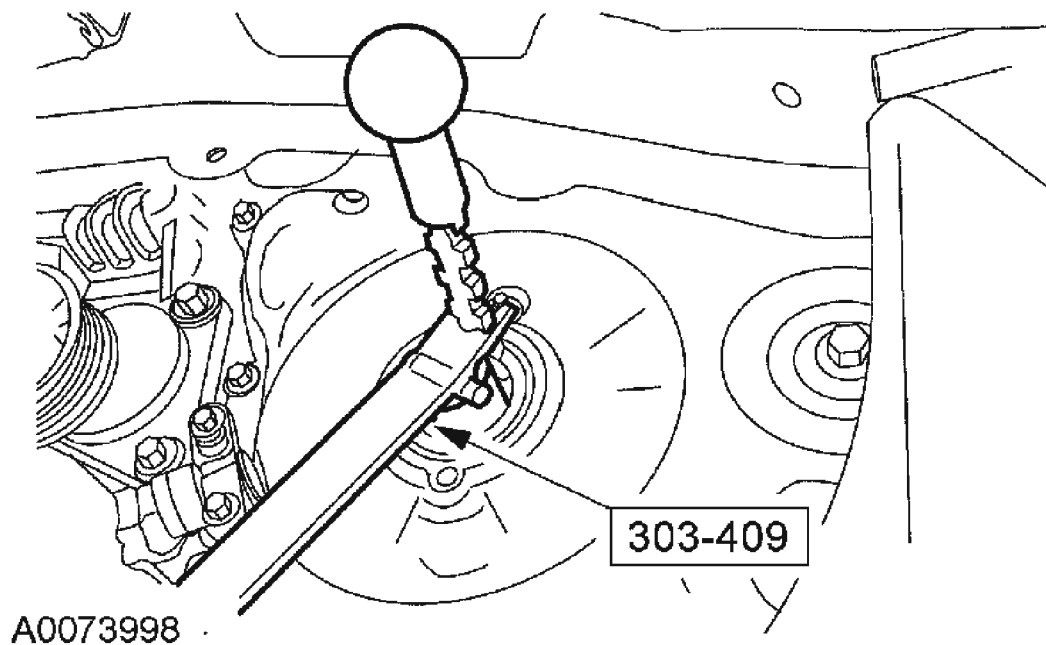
Using Special Tool To Remove Crankshaft Front Oil Seal
